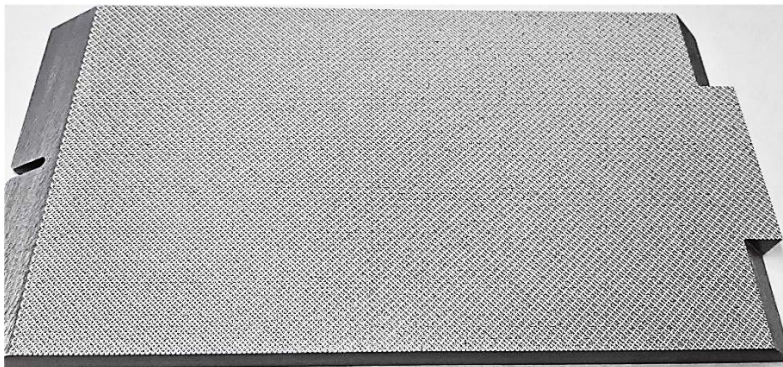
Engraved welding plate, Aluminum EN 6068, courtesy LS INTEH srl
